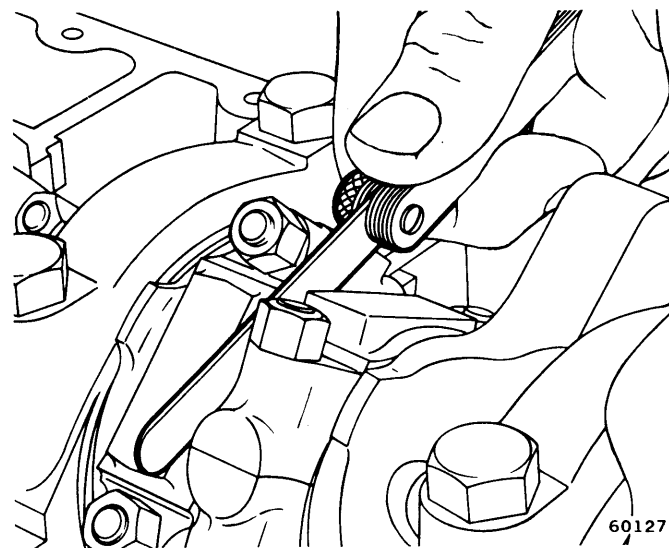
B-38 Connecting Rod Side Clearance Measurement
